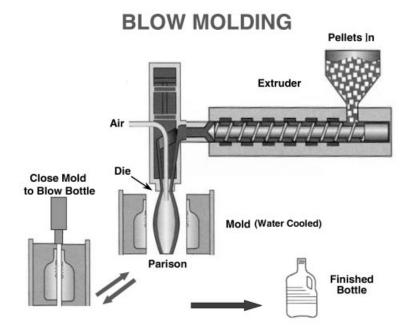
The HDPE blow-molding processing steps: (a) extrusion of parison, mold is open; (b) mold is closed; (c) air is blown into parison; and (d) mold is opened for removal of article.
